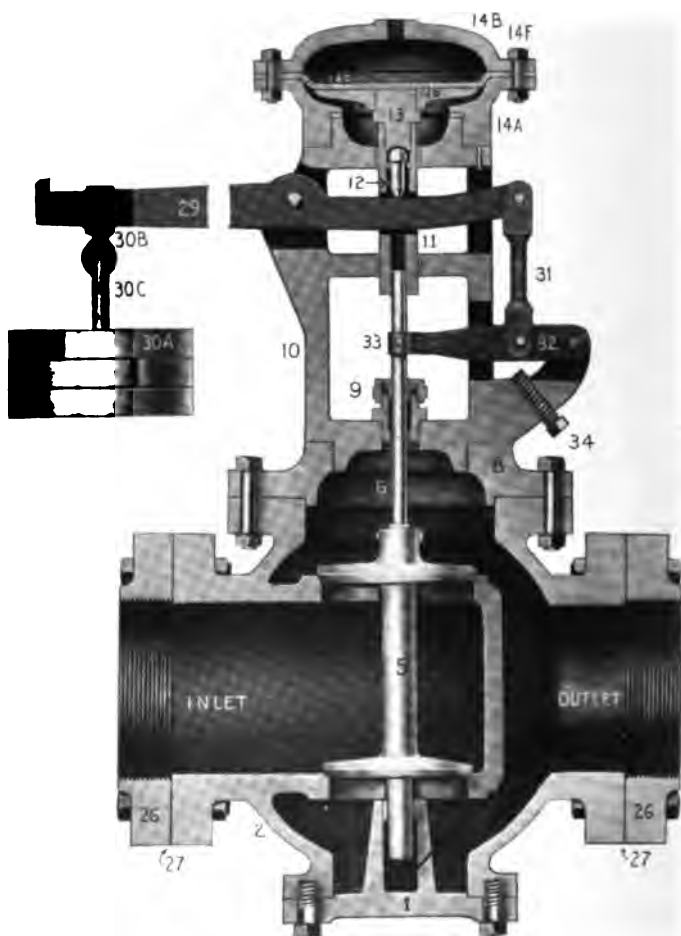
SECTIONAL VIEW OF BOILER GAS REGULATOR. STEAM CONNECTION IS MADE WITH THE TOP OF DIAPHRAGM CHAMBER
